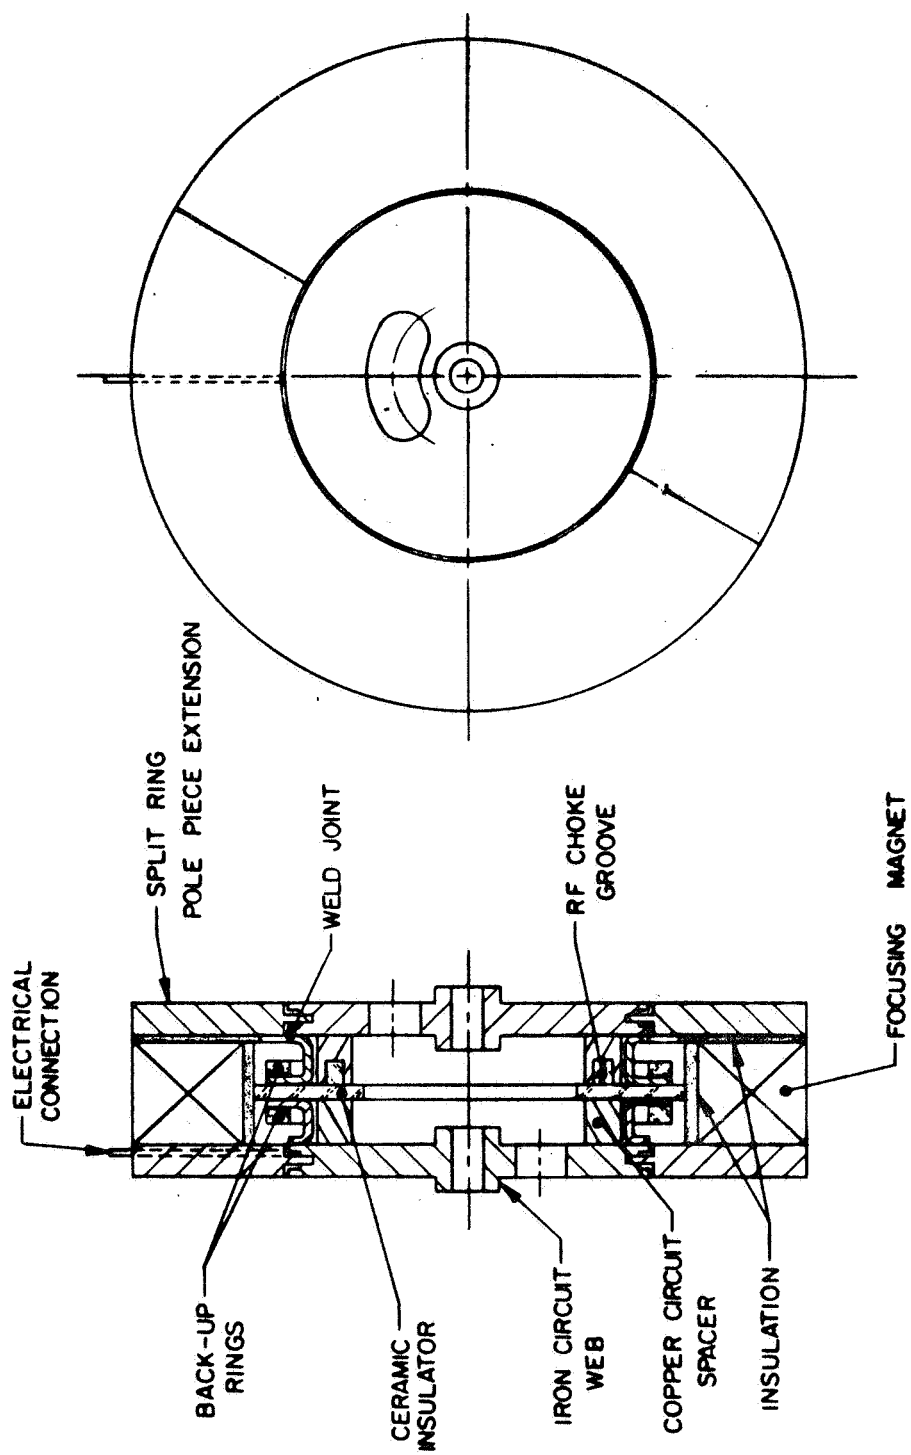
Voltage jump insulator assembly with iron cavity walls.
